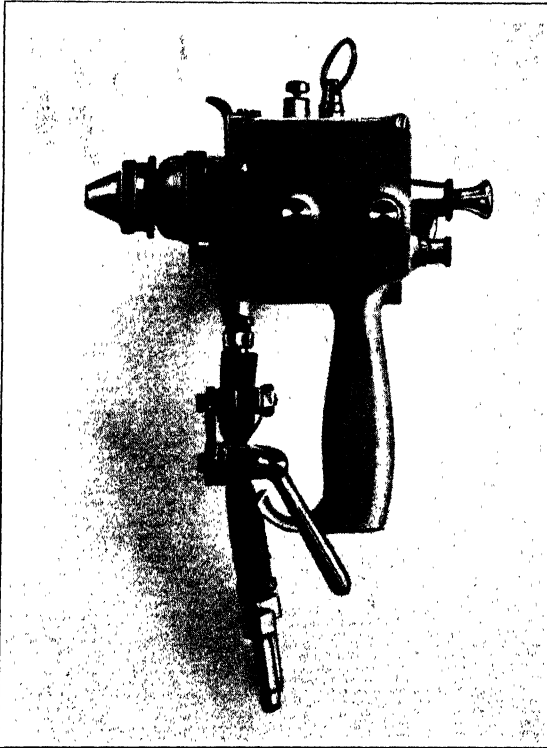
Metal-spraying Pistol as used in England and France (Hand-grip indicates size).
